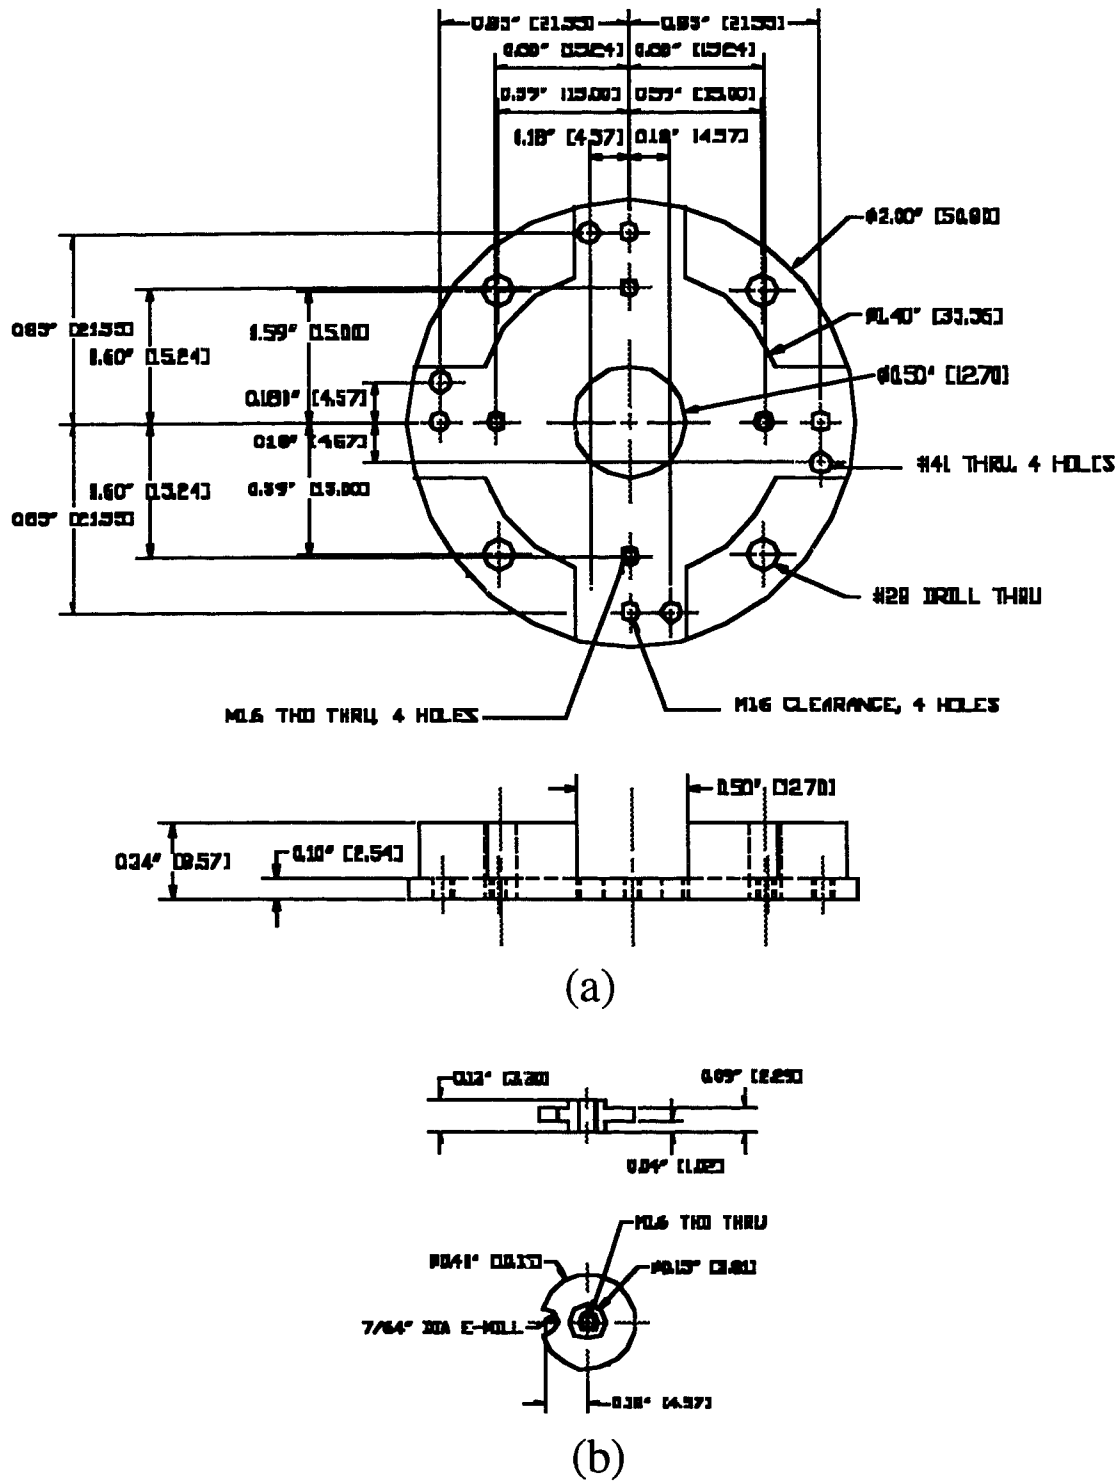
(a) Top plate encasing the package with threaded holes for the actuator screws from the top surface, and (b) washer-like rings to provide the upward motion of the package in conjunction with actuator crews located by the through holes on the piece shown in (a).
